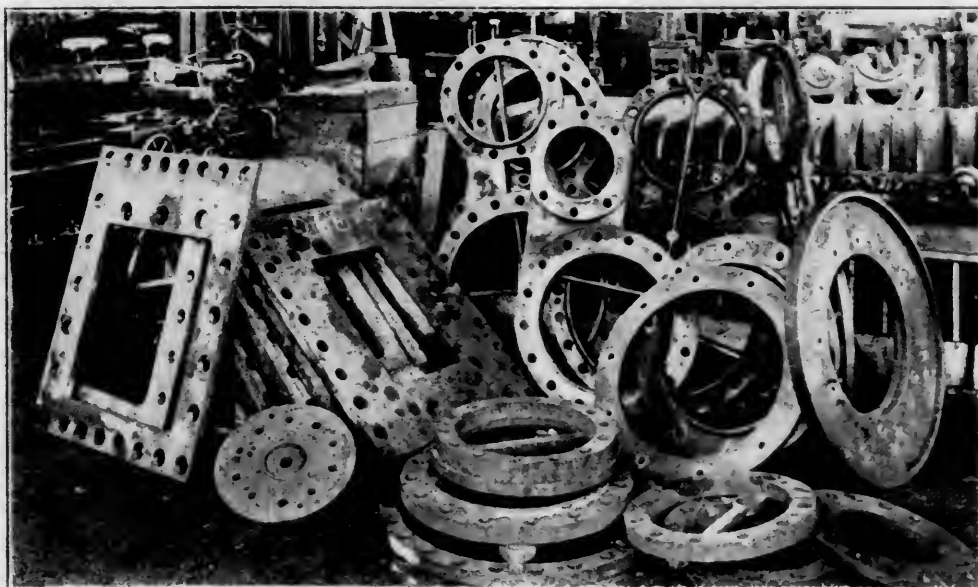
CYLINDER, CYLINDER HEAD AND STEAM CHEST JIGS FOR DRILLING STUD HOLES ACCURATELY. THIS INSURING THE USE OF STANDARD MANUFACTURED PARTS. HARDENED STEEL PUSHINGS FOR THE VARIOUS SIZES OF DRILLS ARE PROVIDED WITH THESE JIGS.
